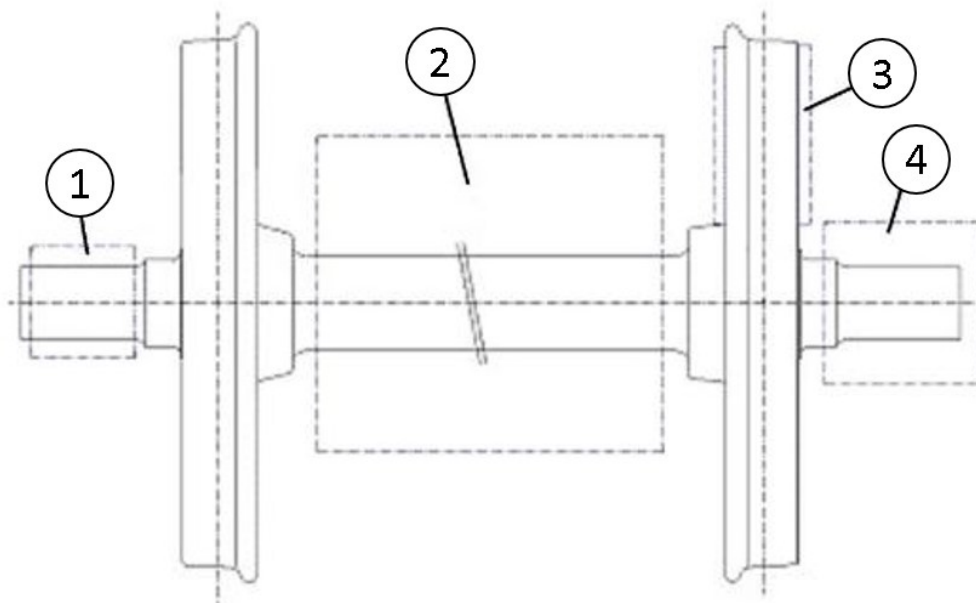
Secondary components of a wheelset [12]. 1) Bearings 2) Brake disc, transmission or final drive 3) Wheel-mounted brake disc 4) Axle box with bearings
